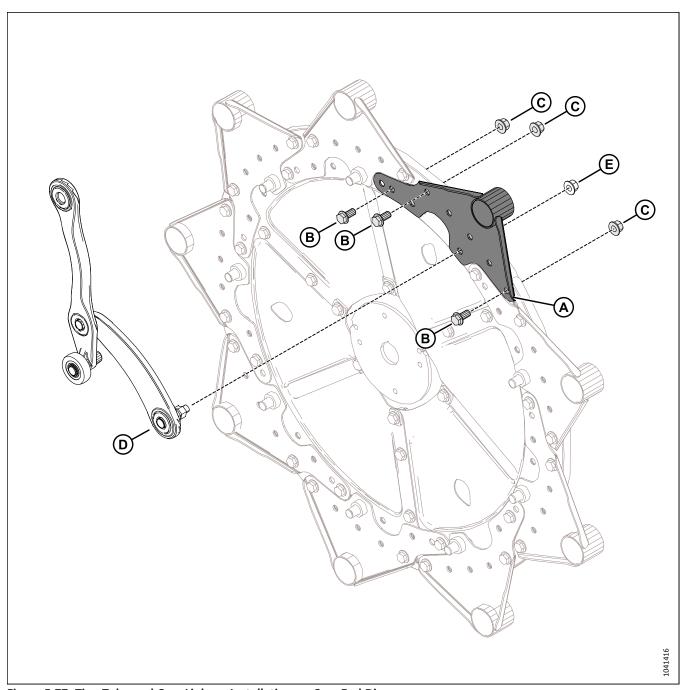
Tine Tube and Cam Linkage Installation on Cam End Disc
